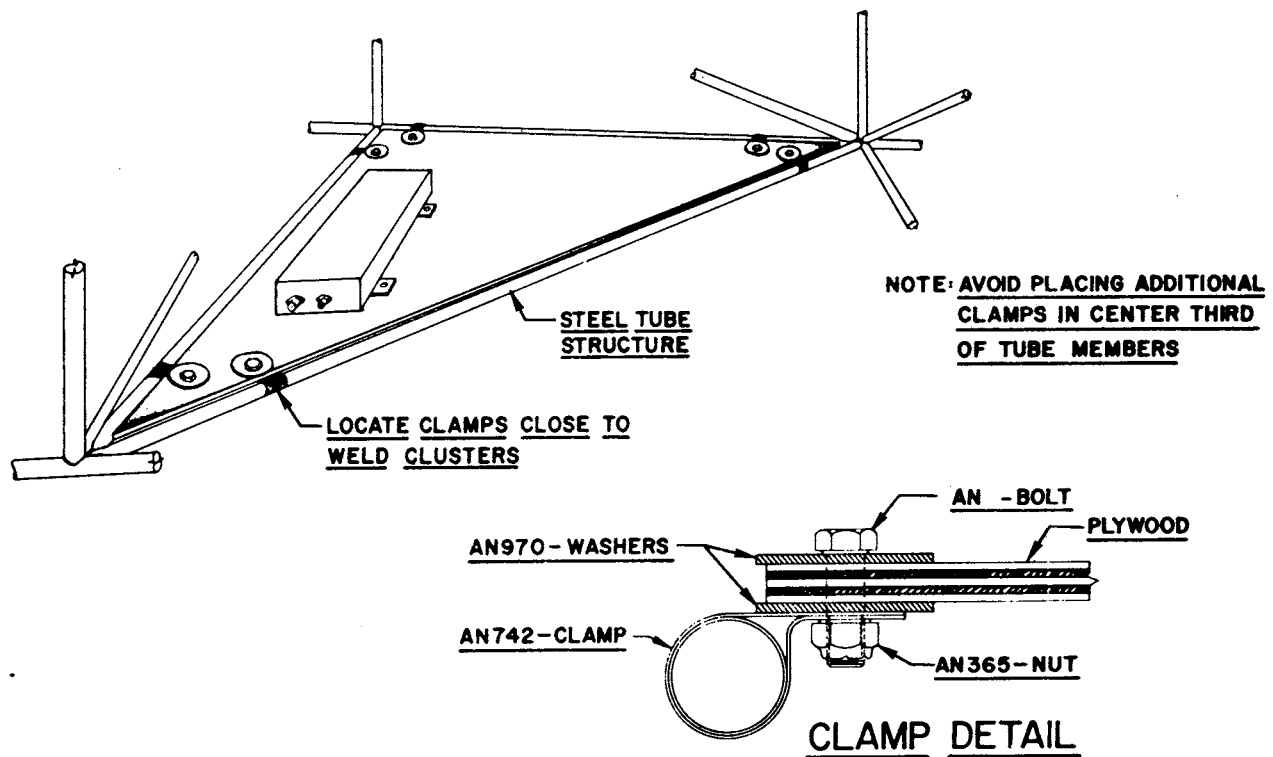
Typical attachment of support structure to tubular frame.
